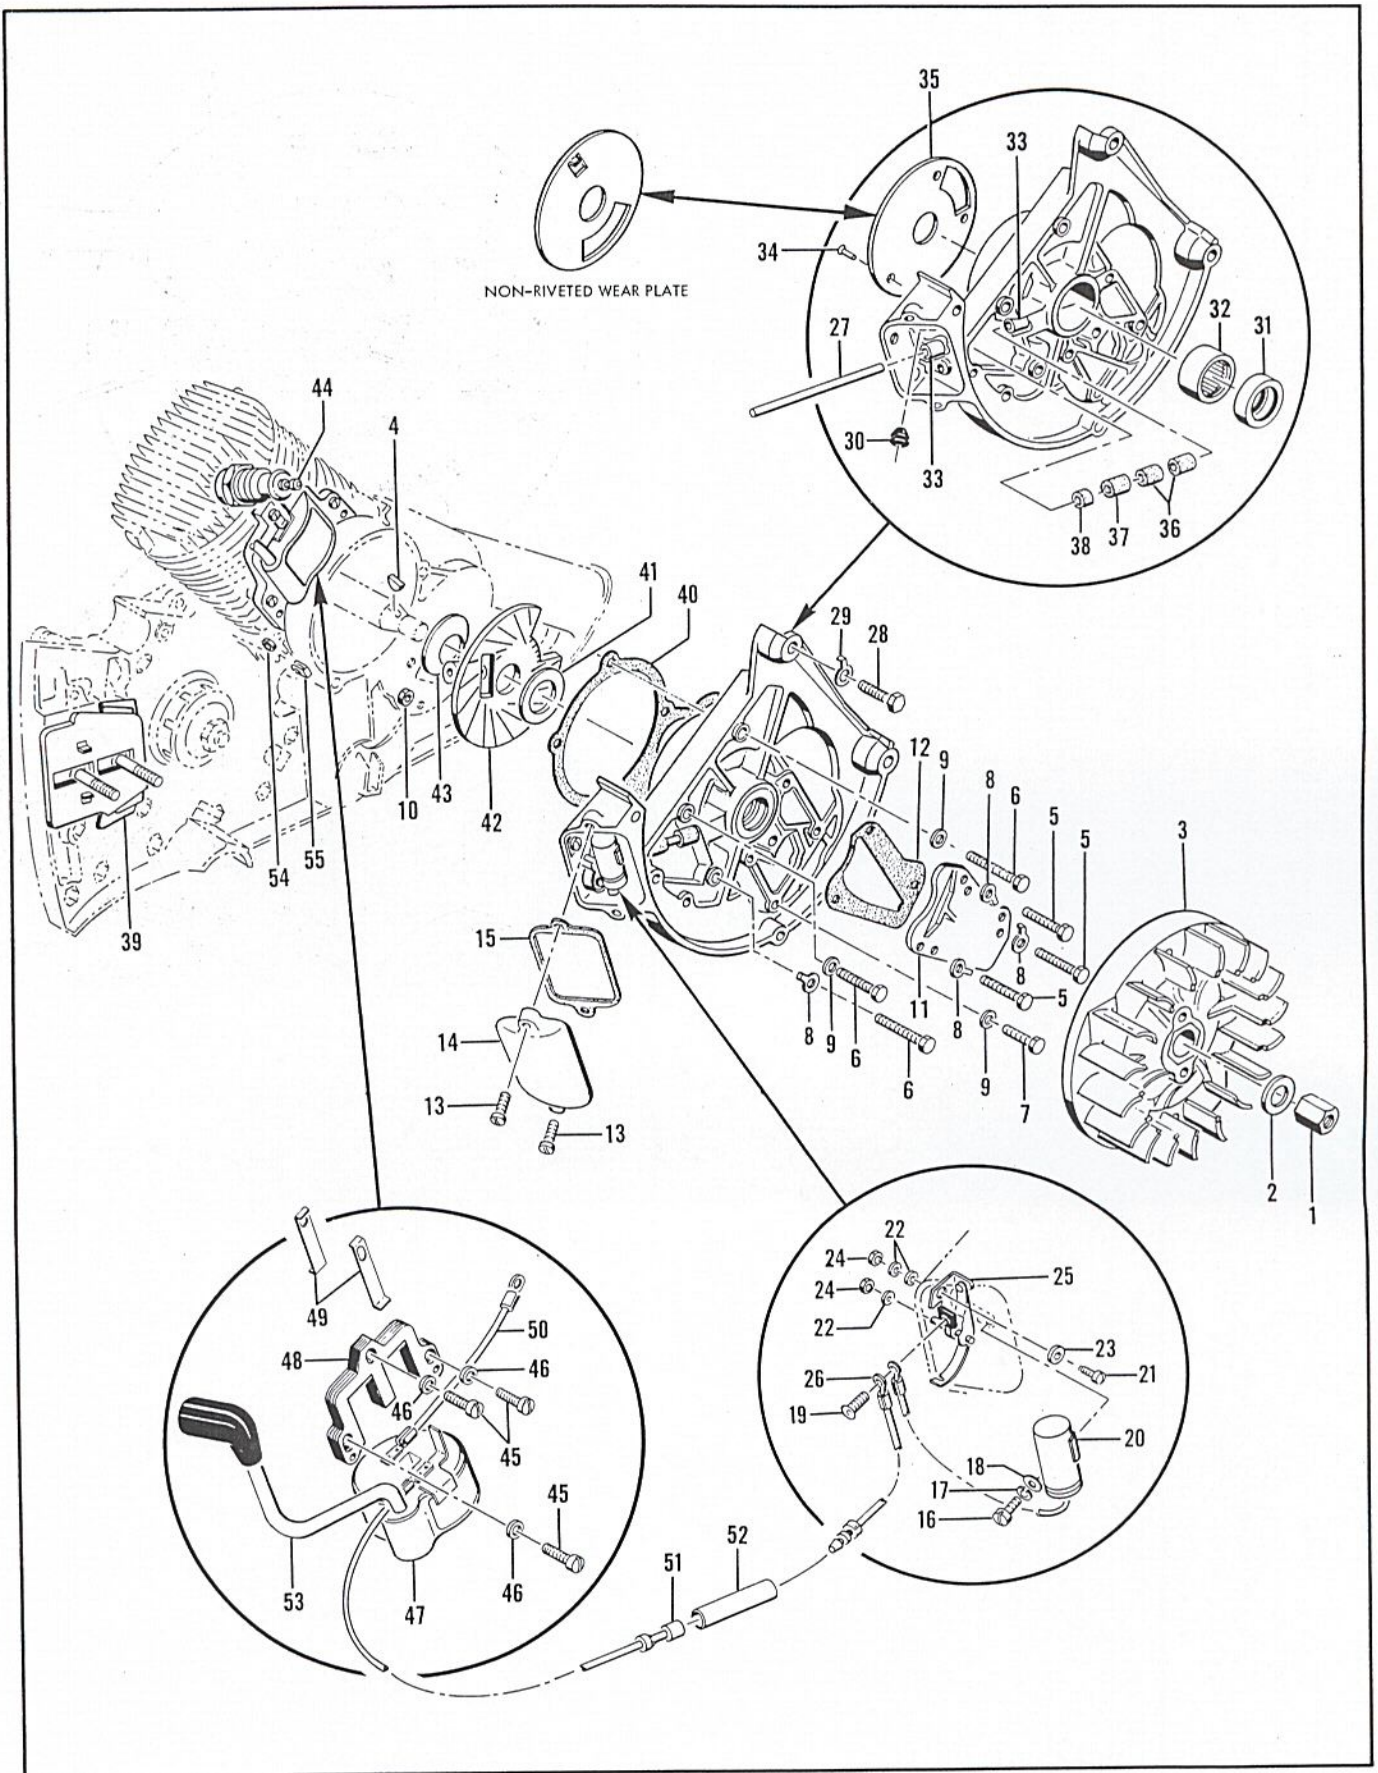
Ignition System, Flywheel, Crankcase Cover and Rotary Valve
